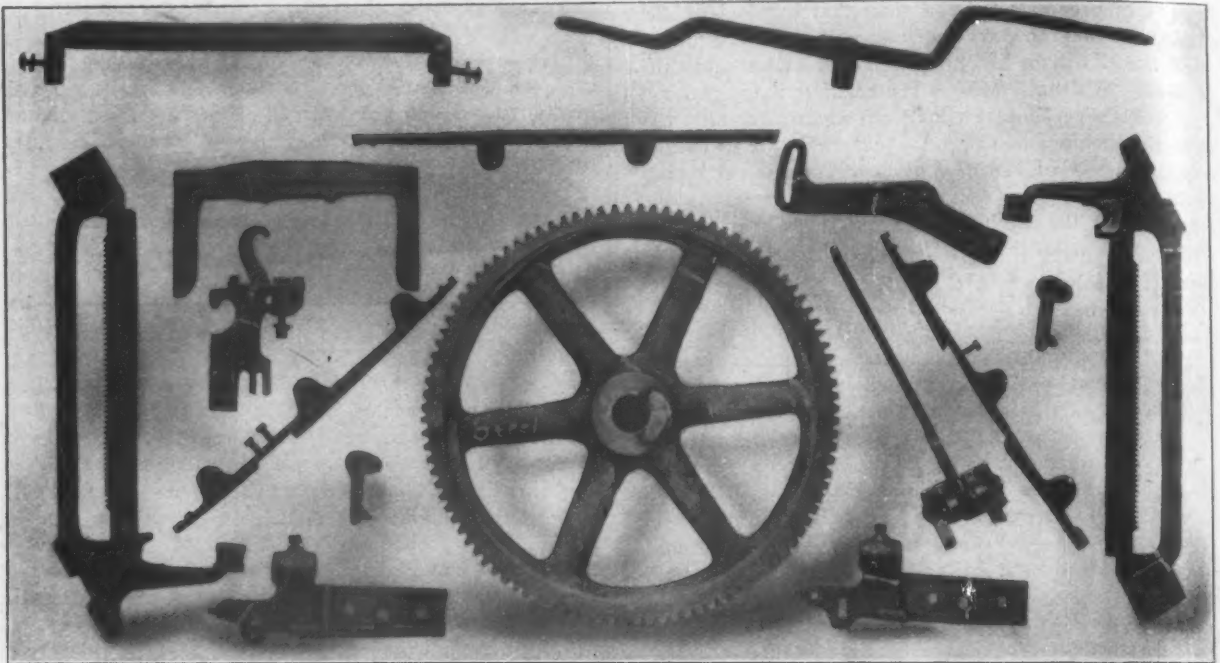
Specimen Pieces Welded by the New Electric Process Employed by the Hub Machine, Welding & Contracting Company, Philadelphia, Pa.
